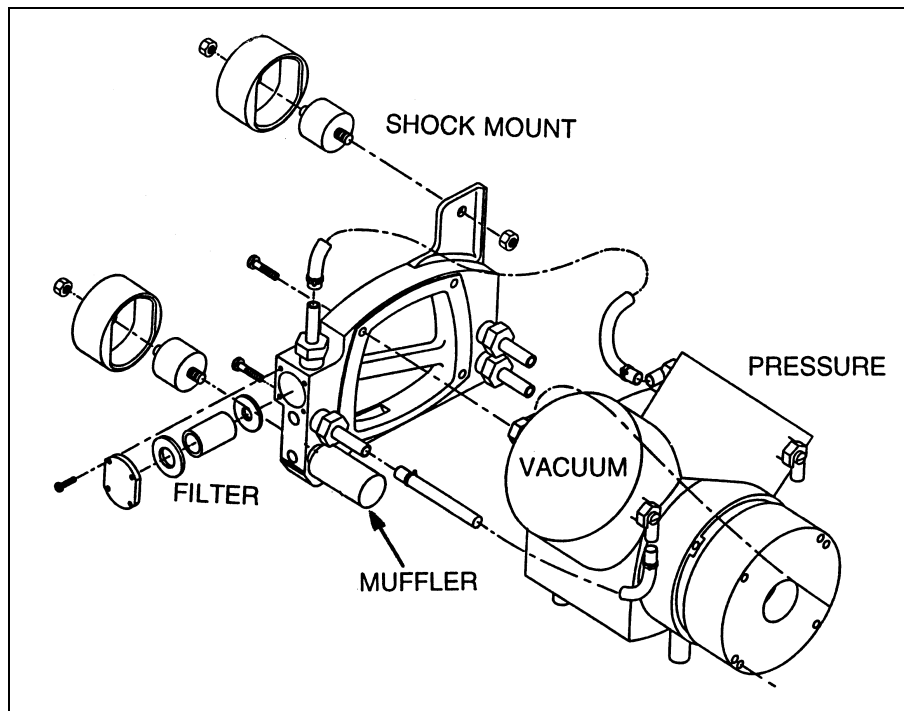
Pump Assembly, Exploded Isometric View
